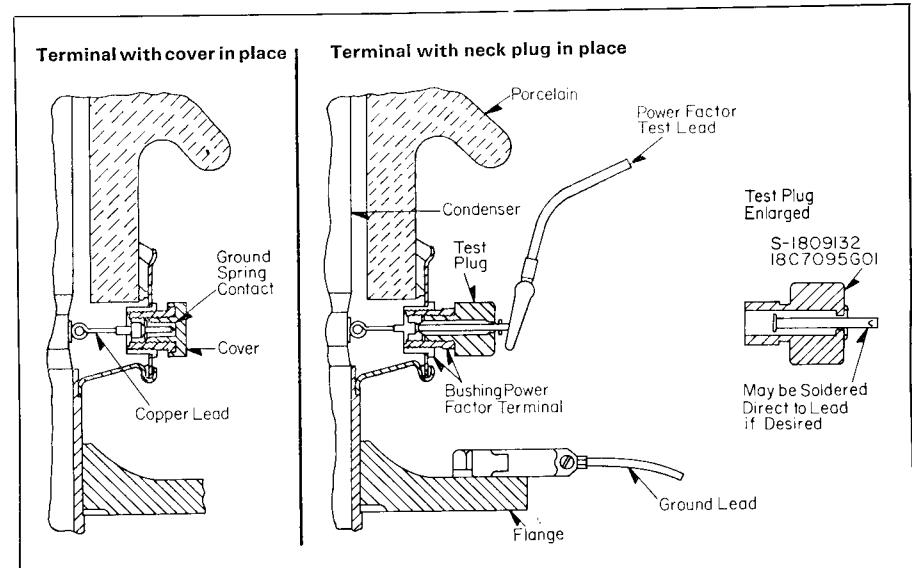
Power Factor Testing Terminal for Making Ungrounded Power Factor Tests on Condenser Bushings 69 Kv and Below.
